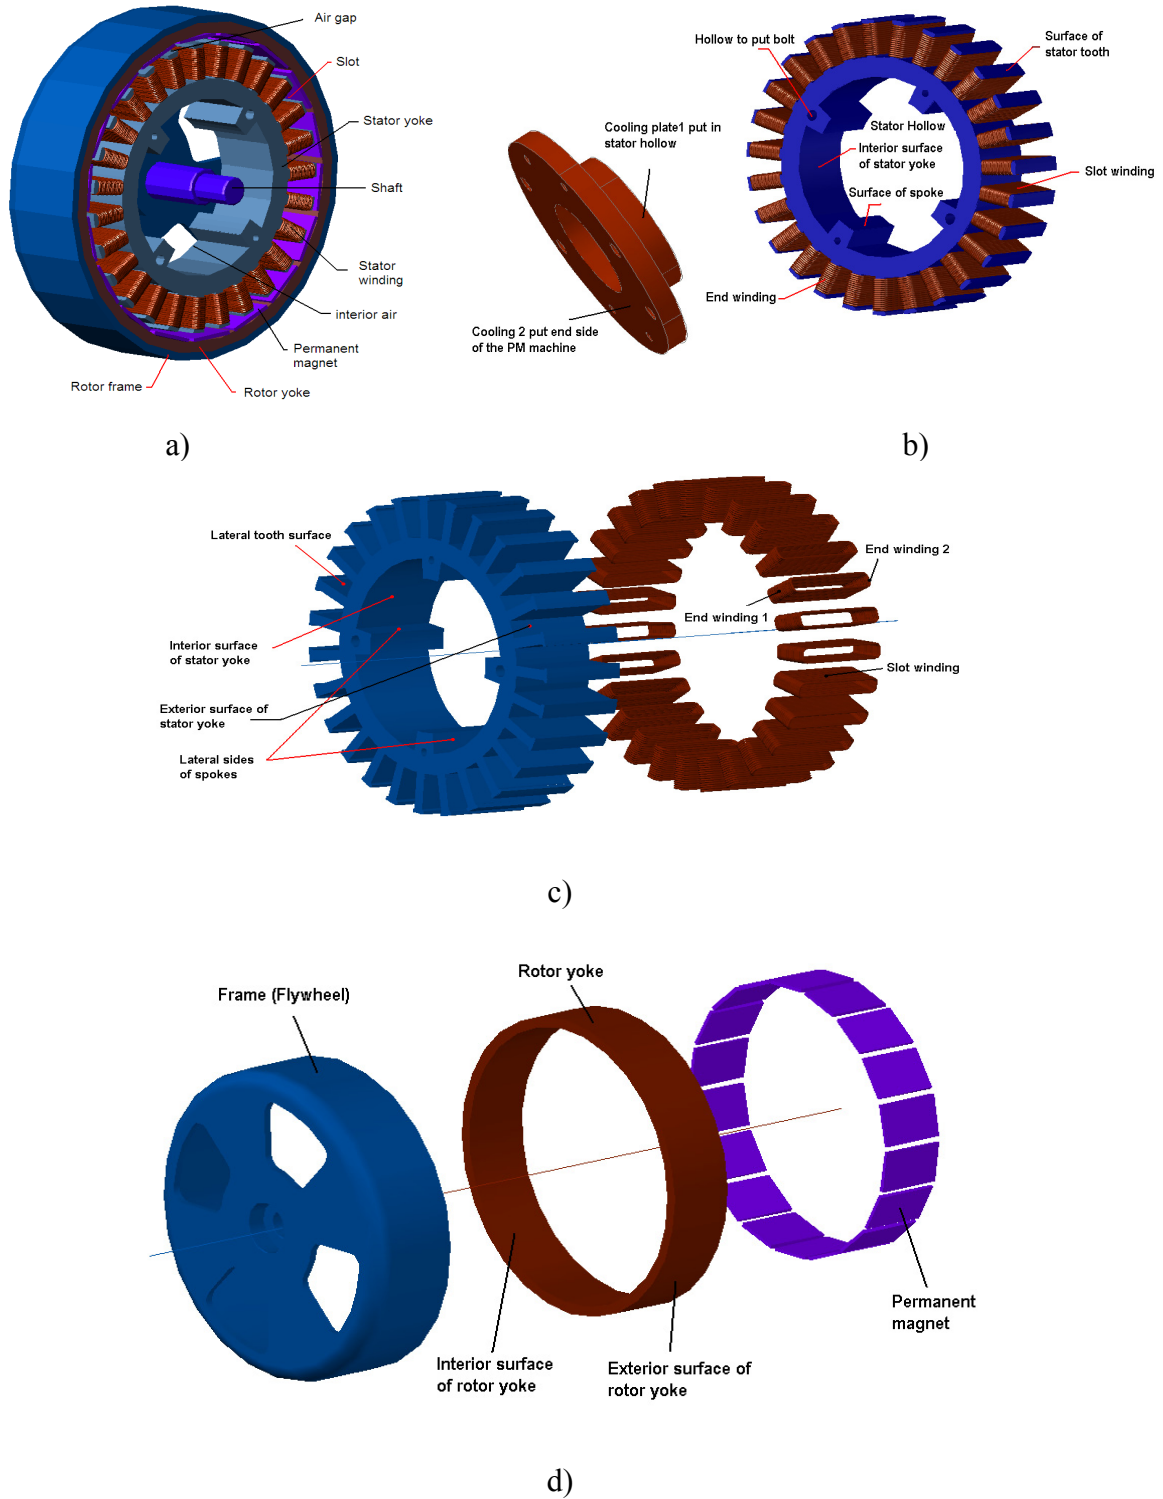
Configuration of a PM machine system: a) 3D geometry, b) Cooling plate and stator, c) Stator core and windings, d) Parts of rotor.
